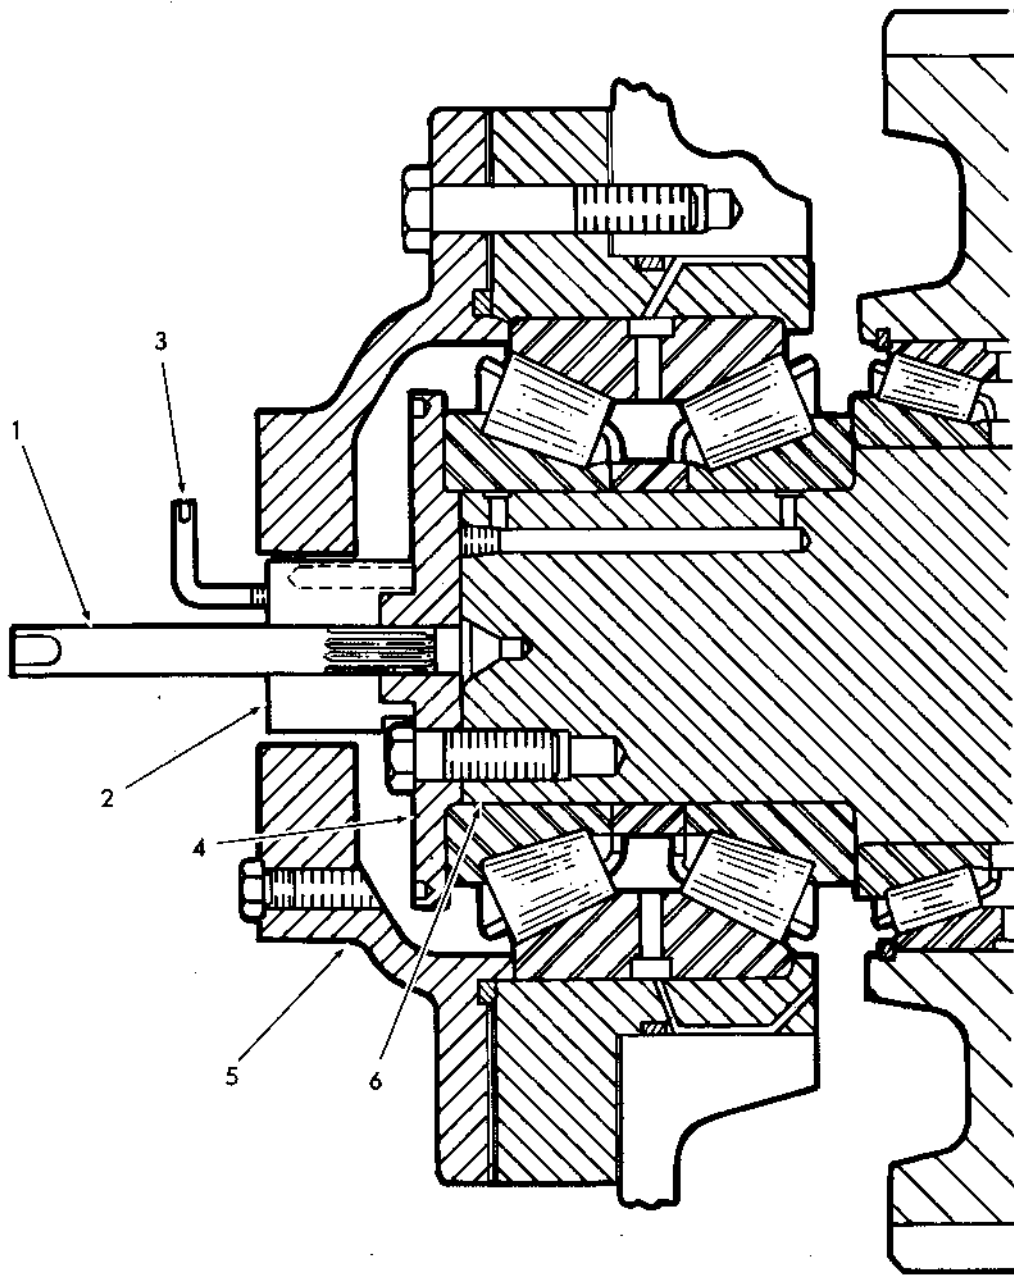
SPECIAL TOOLS INSTALLED FOR CHECK BACKLASH BETWEEN BEVEL GEAR AND PINION T-81756
